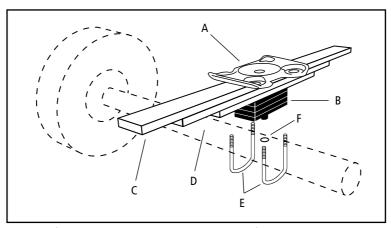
, leaf spring with spring clamping plate (A), elevation (B), leaf spring (C), axle (D) and new, extended spring shackle (E) and centering on axle (F).
